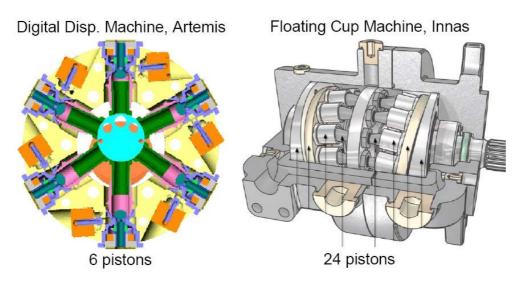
Artemis DD machine and Innas Floating Cup machine, [2], [6]
